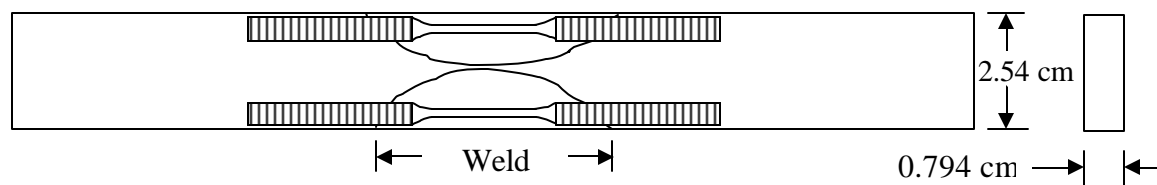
Diagram indicating position of where specimens were machined from in weld. Note that entire reduced section is contained within the weld fusion zone.
